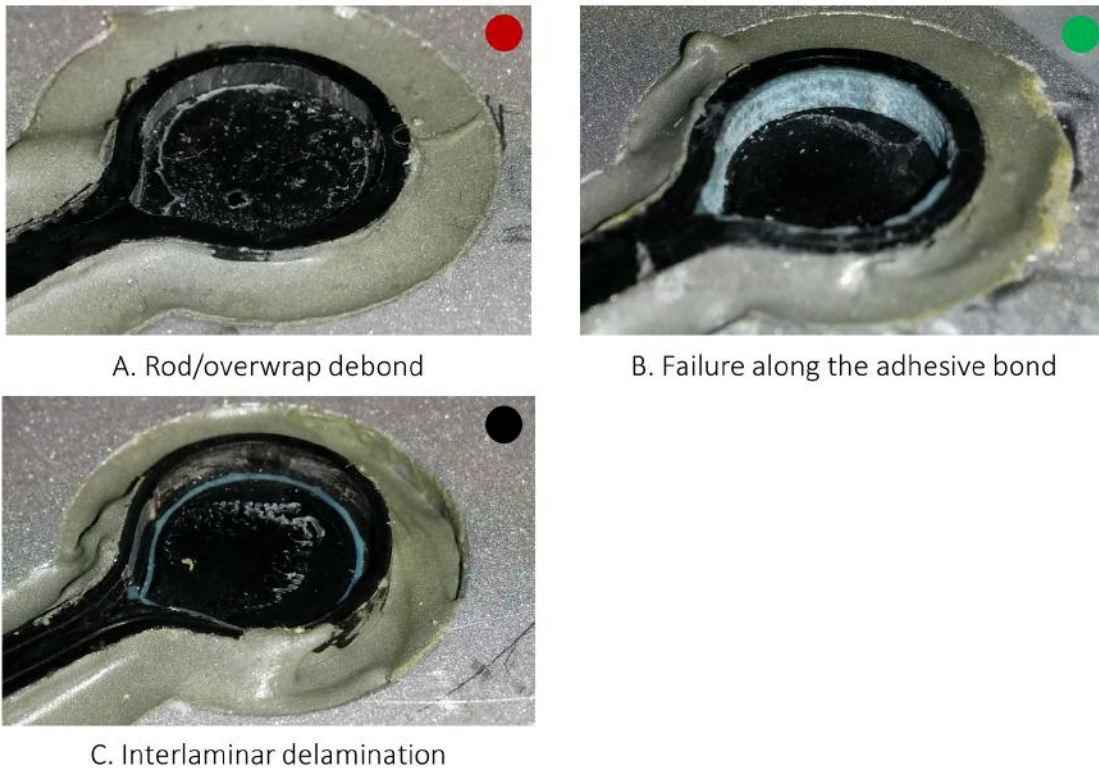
Types of failure observed in the stringer rod push-out specimens.
